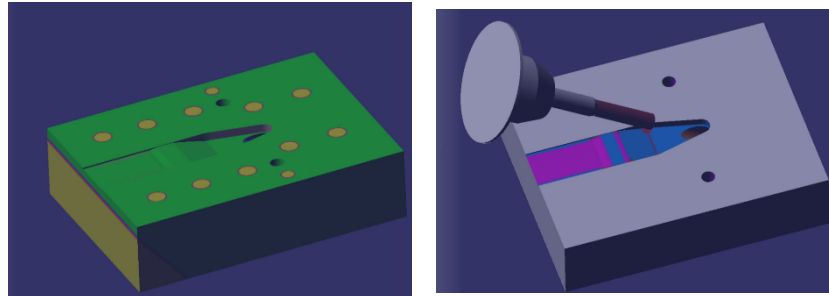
3D model of top plate (a), 3D model of bottom plate (b)
